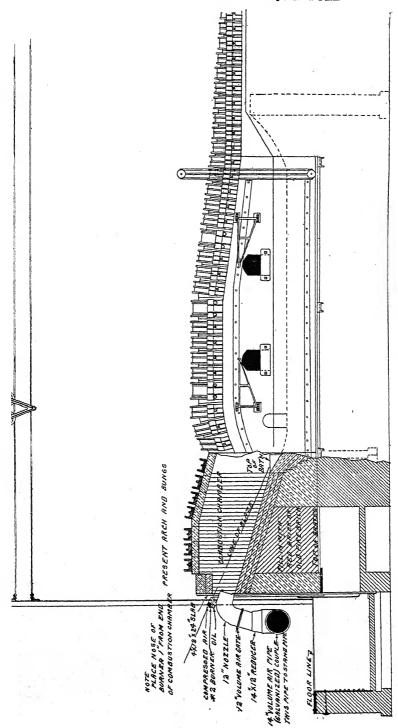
Twelve-ton Air Furnace Operated with One Burner.
